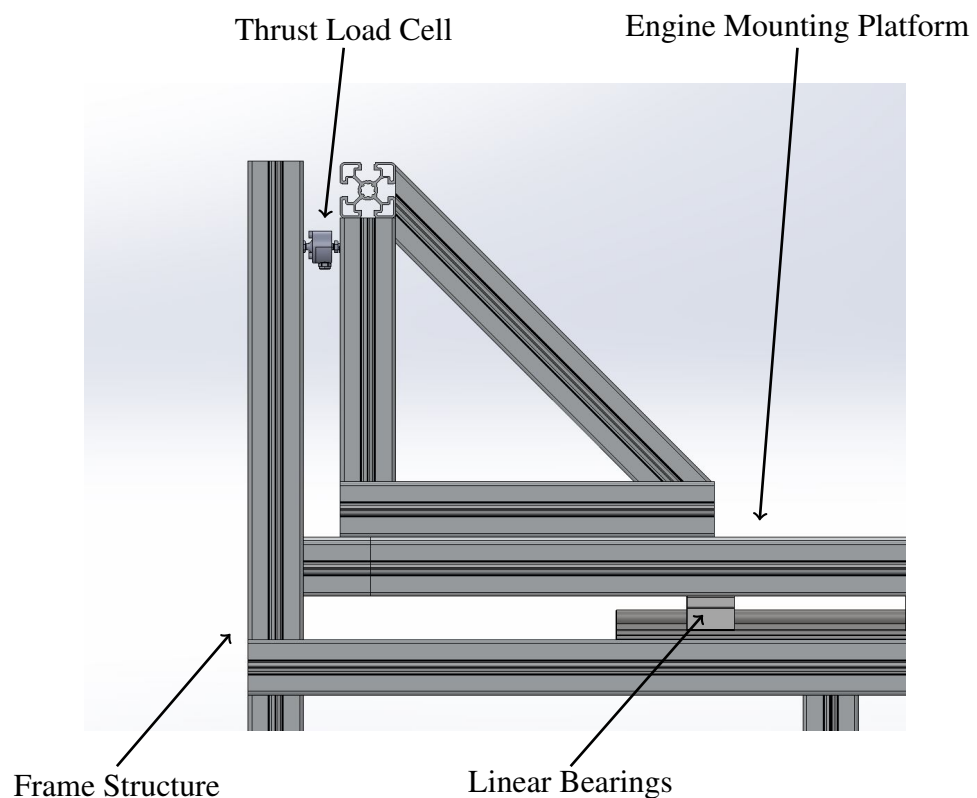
View of the thrust load cell mounting location on the test stand.
